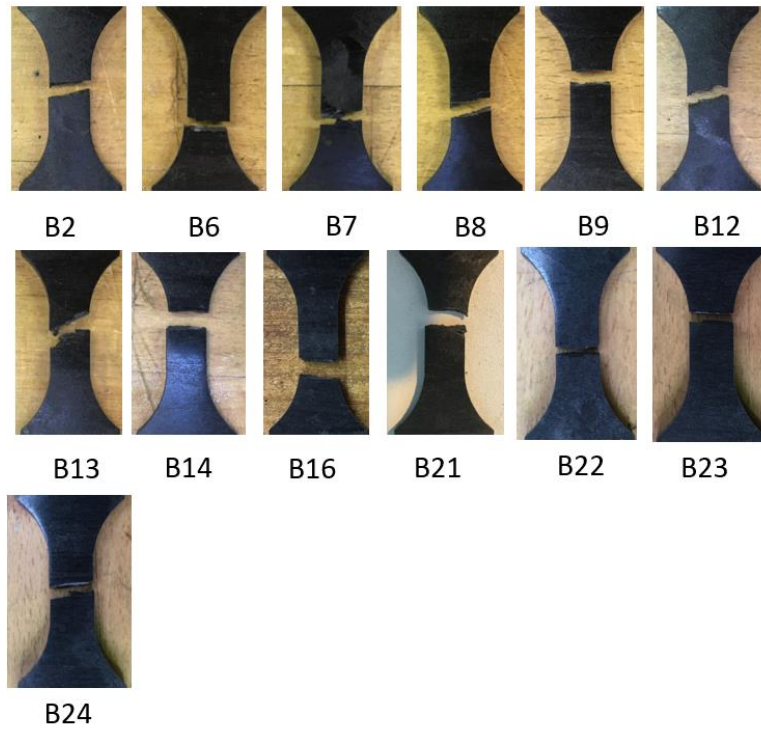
Fracture specimens for 90° coupons at R=-1.
